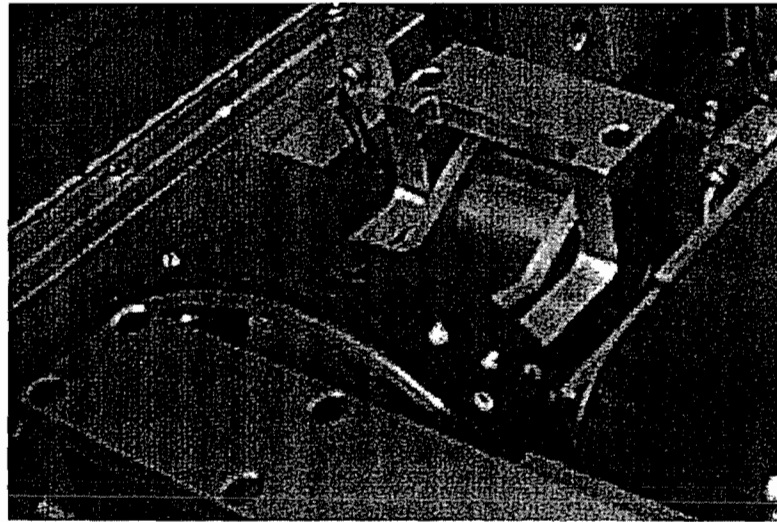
Addition of Machine Screws to Gripper Shoes
